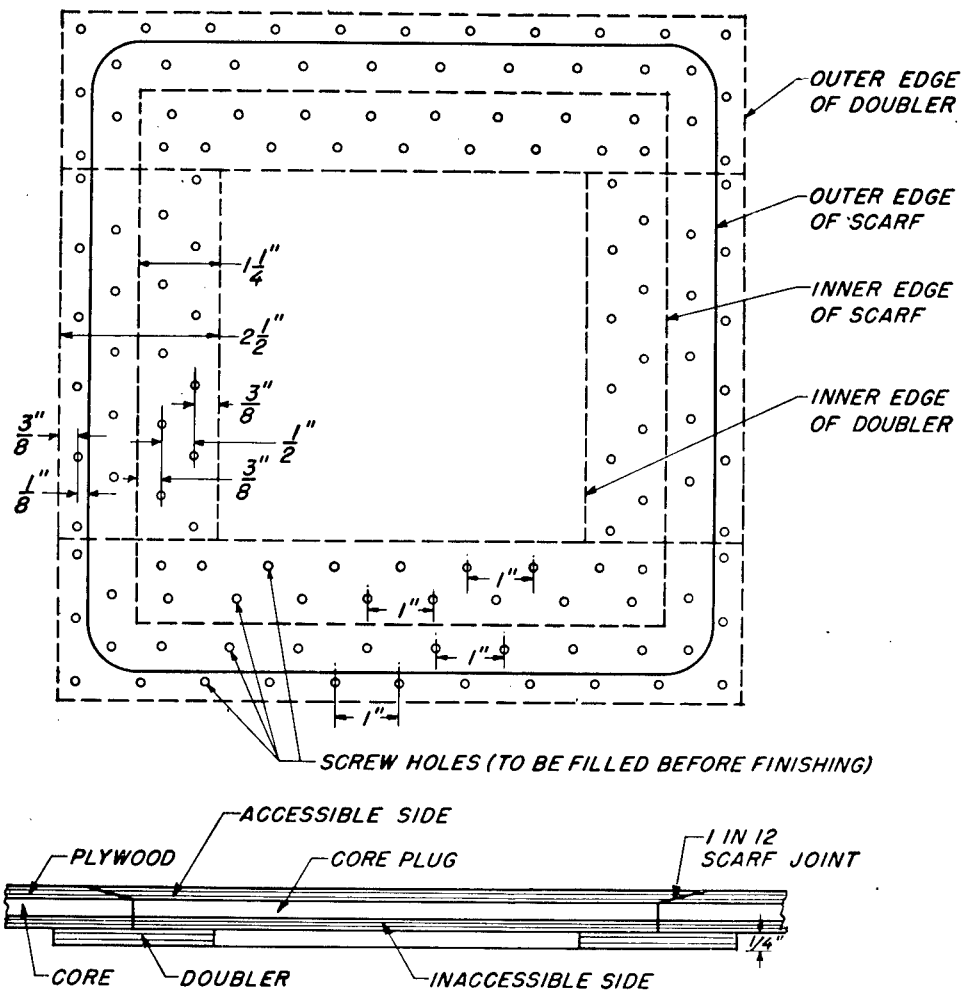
Square or rectangular patch assembly used in plywood-faced parts when one side only is accessible.
